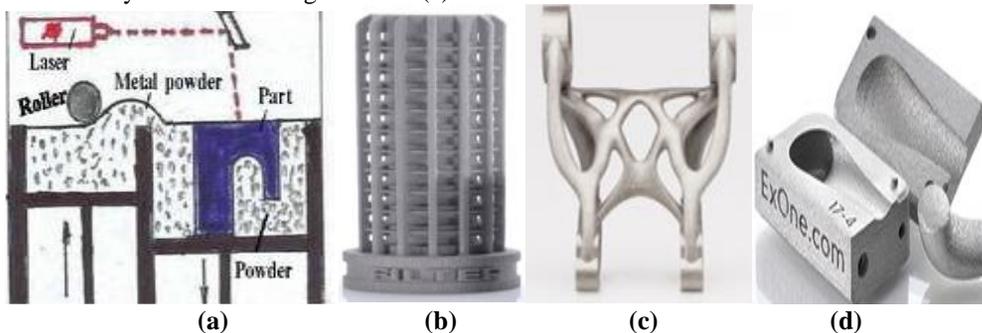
(a) Schematic representation of the Binder Jetting process of metal 3D printing, (b) Metal filter, (c) Compound metal component and (d) Binding injection moulding by 3D printing of one metal casting tool from ExOne.com (ExOne, 2020)
